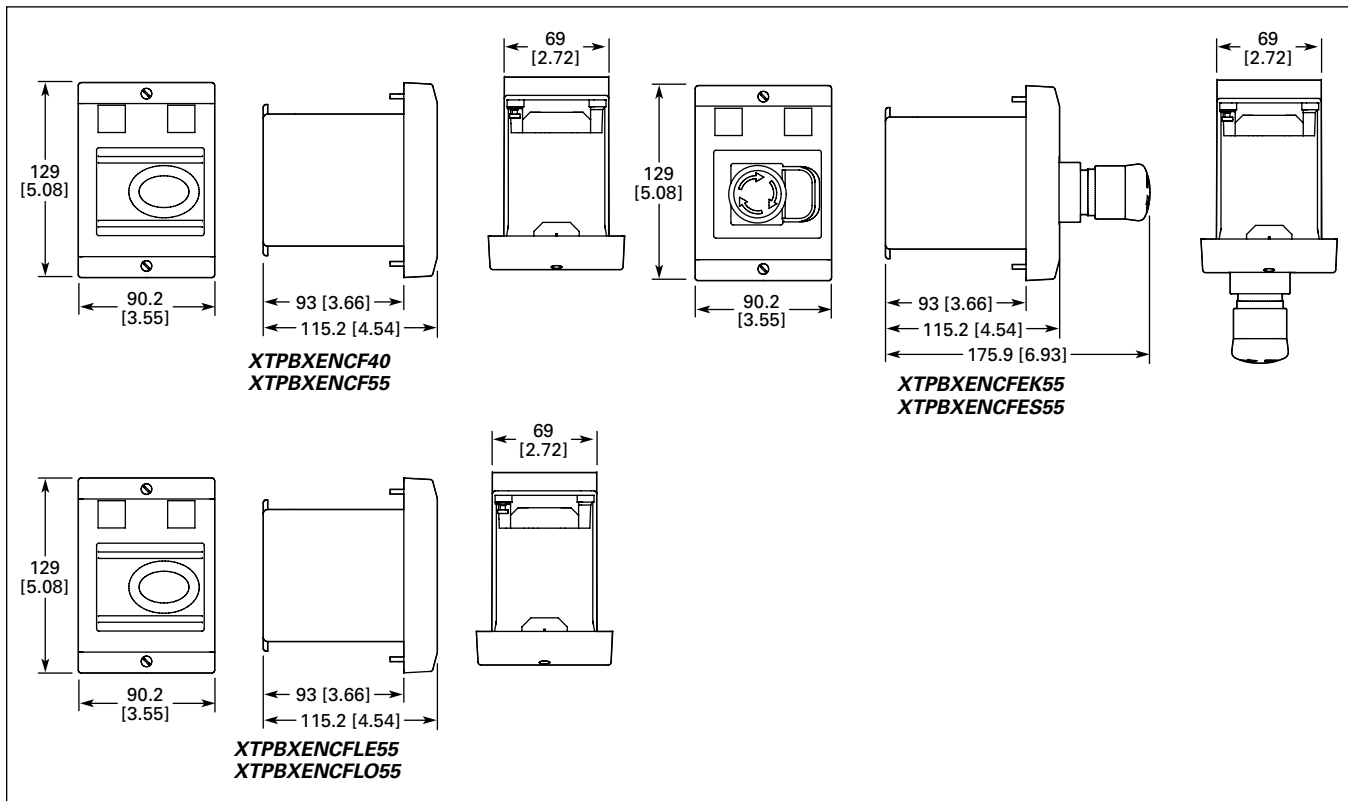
Insulated Enclosures for Flush Mounting of XTPB Manual Motor Protectors (Approximate Dimensions in mm [in])
